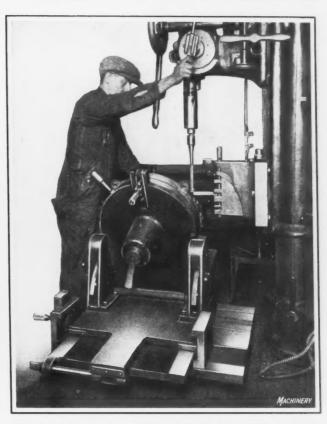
Fixture set in an Inclined Position for reaming the Nozzle
